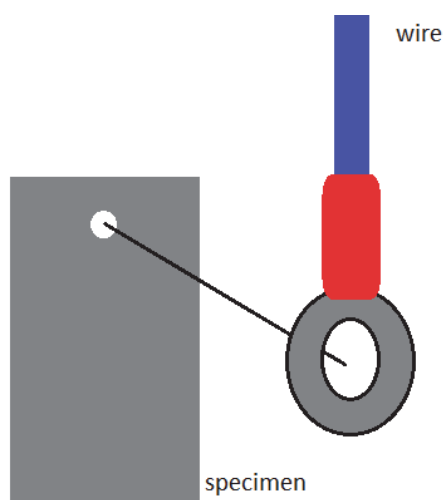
Fastening of electrical wire to the specimen. The rivet goes through the two holes, as marked by the black line.
